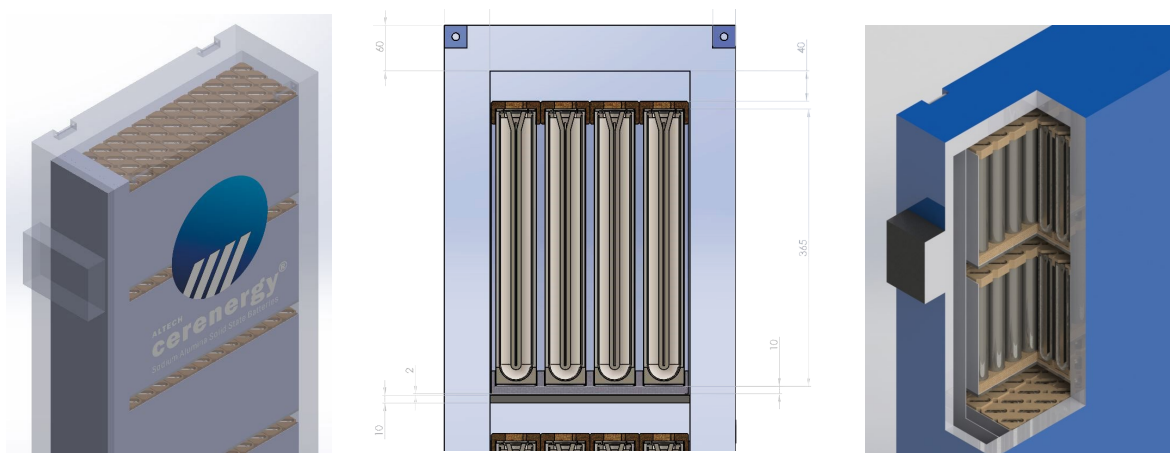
Cross section of the ABS60 battery pack showing cell configuration
